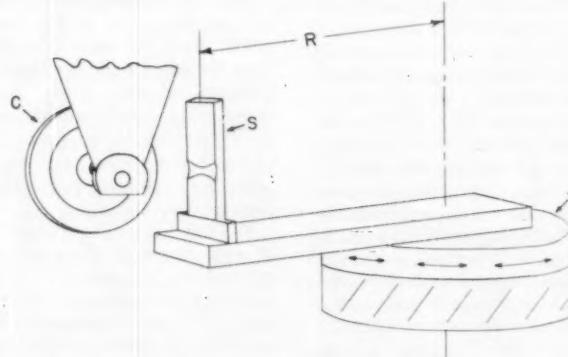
Schematic diagram of the milling machine setup for producing the toric surfaces on the specimens. C , milling cutter; S , specimen; T , rotating table on which the specimen is mounted.
